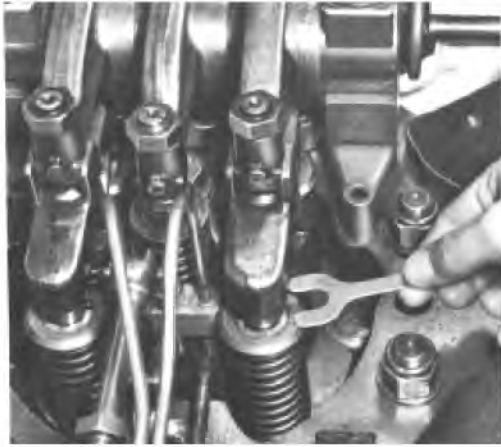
Checking Lash Adjuster To Valve Clearance
